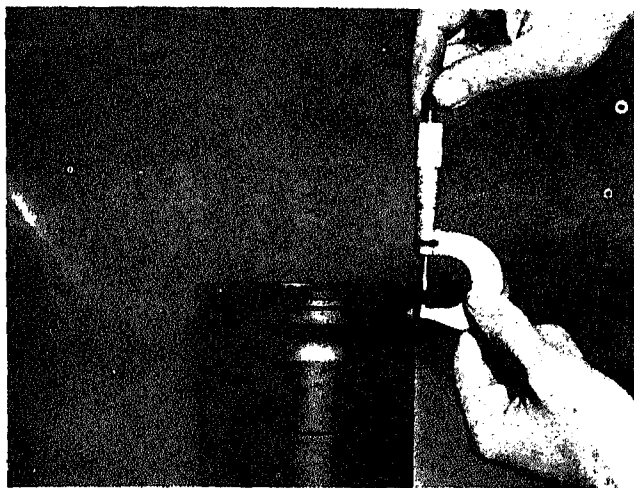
Measuring thickness of cylinder liner flange
